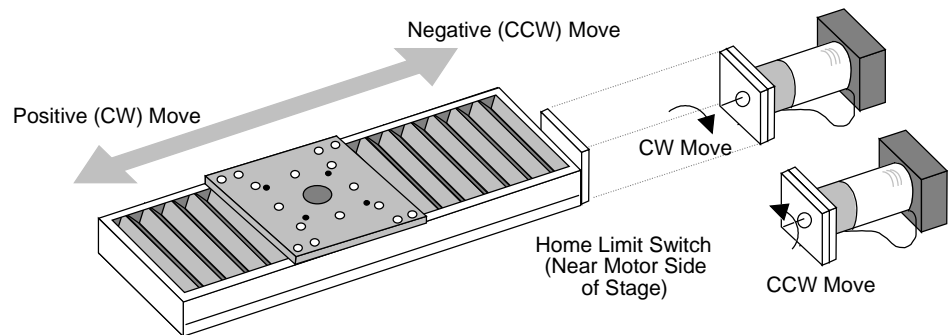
Typical Stage Showing CW and CCW Motor Rotation
